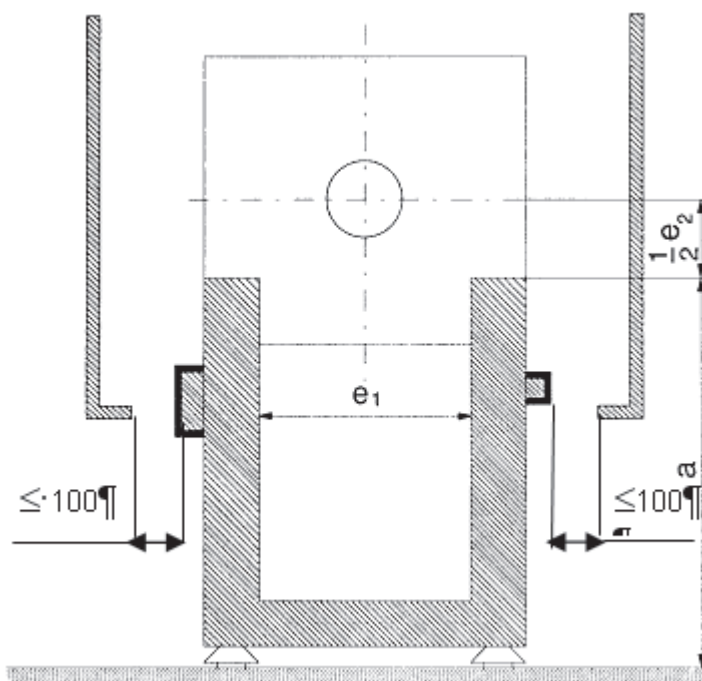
Examples of the positioning of movable guards and dimensions a , e_1 , e_2 for machines without tie-bars
